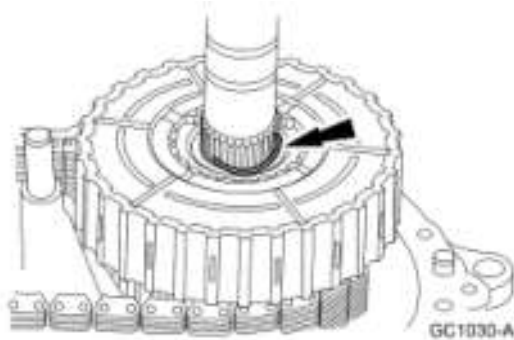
Locating Clutch Pack Assembly & Snap Ring
